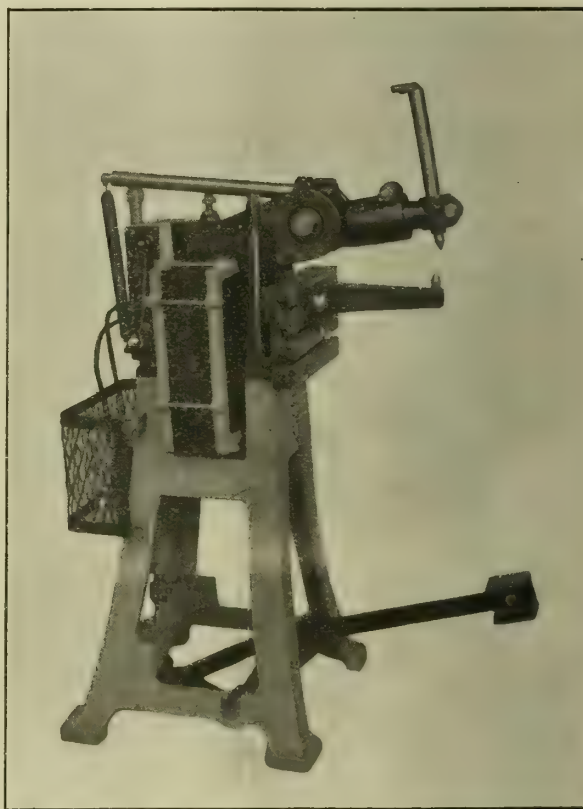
A HELSBY SPOT WELDING MACHINE.
